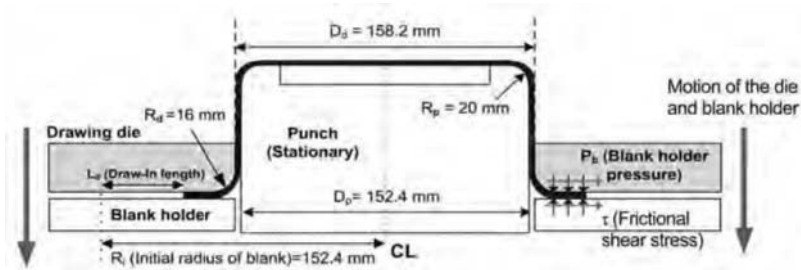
Schematic of deep drawing test and tool dimensions. D_p and D_d = punch and die diameter, respectively. R_d and R_p = die and punch radius, respectively. Source: Ref 7.19
